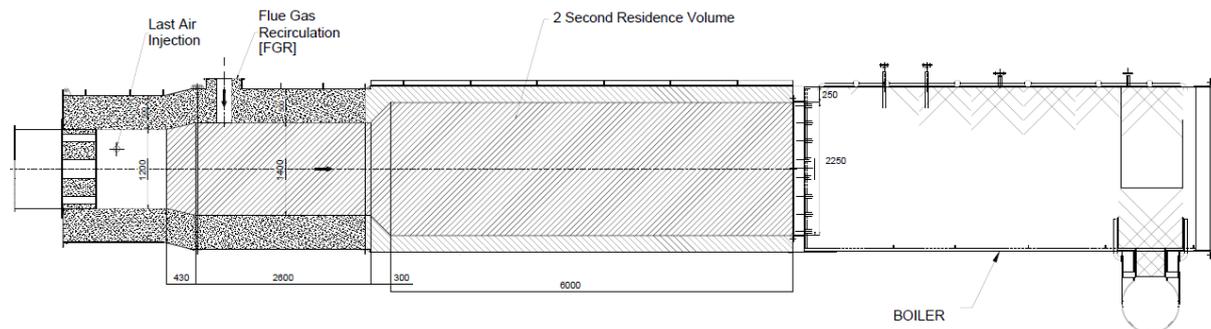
Outline Arrangement of the Combustor, Residence Chamber and Boiler
